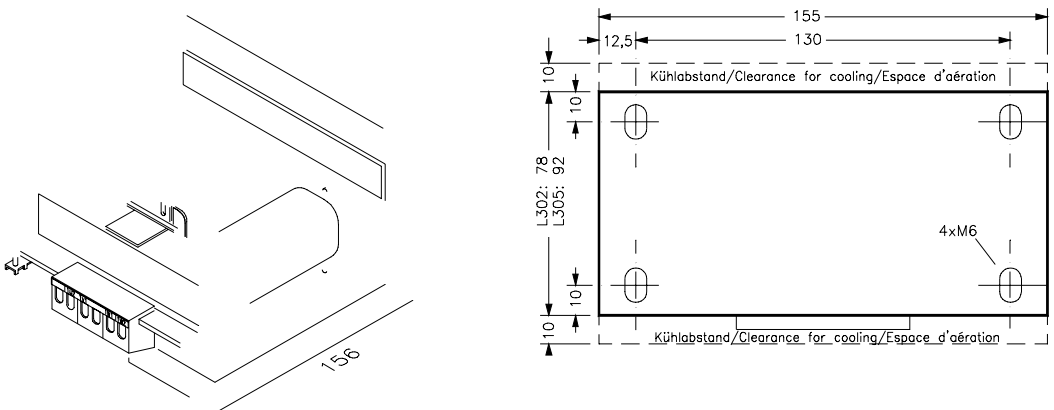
Outline drawings and mounting OPTION L302/L305
